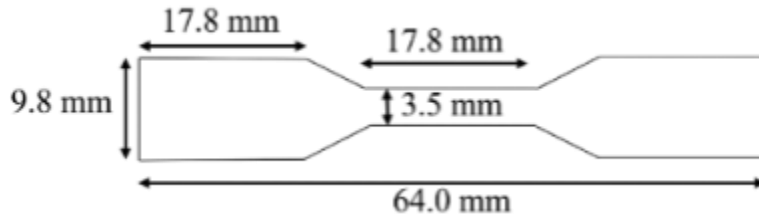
Dog-bone shaped samples dimensions for tensile testing.
